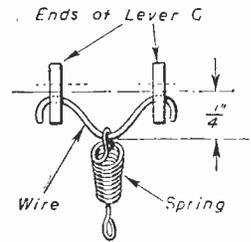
(right).—Detail of method of mounting spring to lever G.
